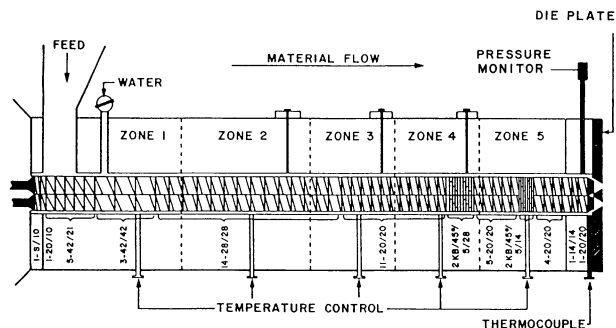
Schematic representation of a Werner & Pfleiderer ZSK-30 twin-screw extruder and the screw configuration used. KB = kneading block, 45°C = angle of flight, X = distance to make one complete revolution, and Y = length of element in millimeters.
